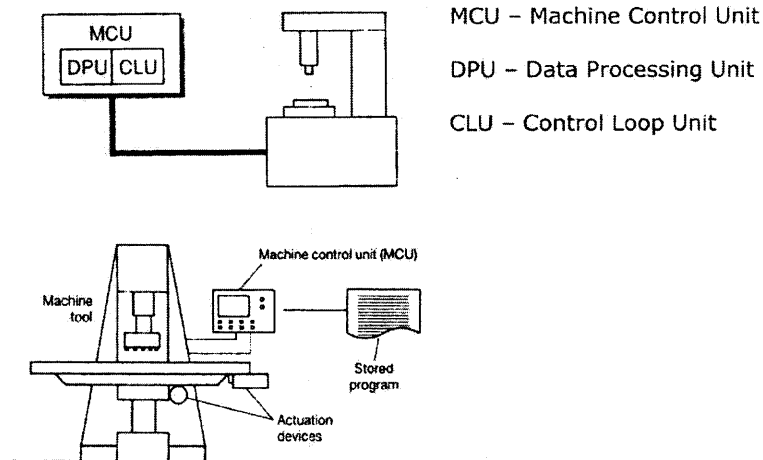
Schematic diagram that shows the MCU, DPU, and CLU used in a CNC machine.
